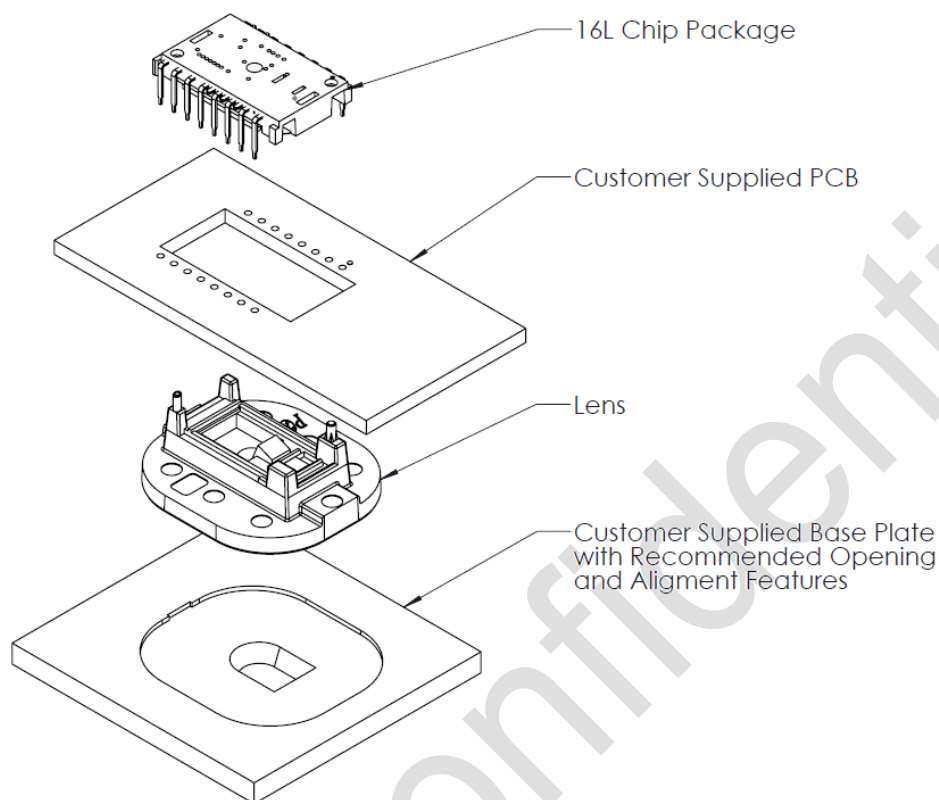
Exploded View of Assembly with LM19-LSI Lens
